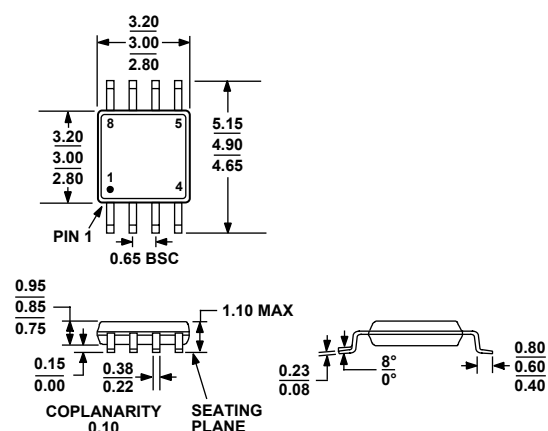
8-Lead Mini Small Outline Package [MSOP]
